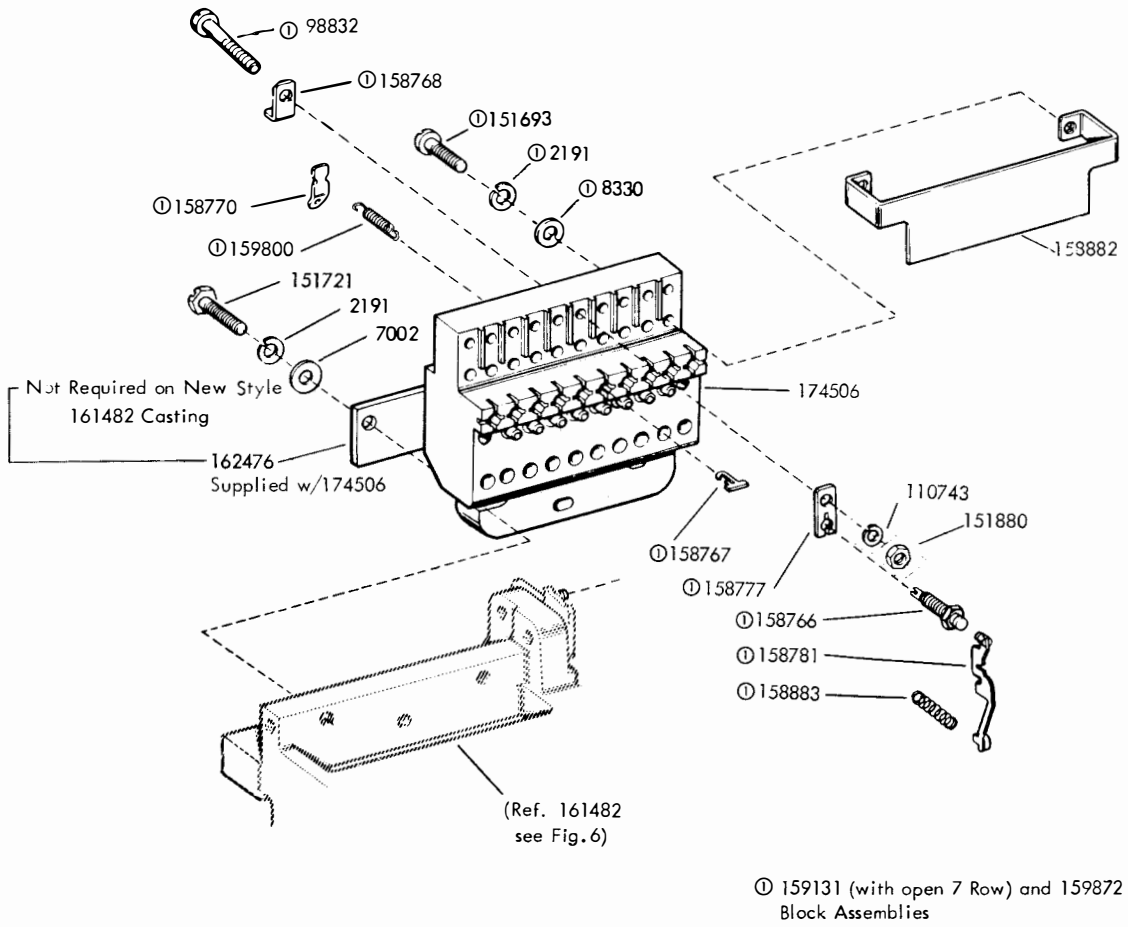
DISTRIBUTOR CONTACT BLOCK
